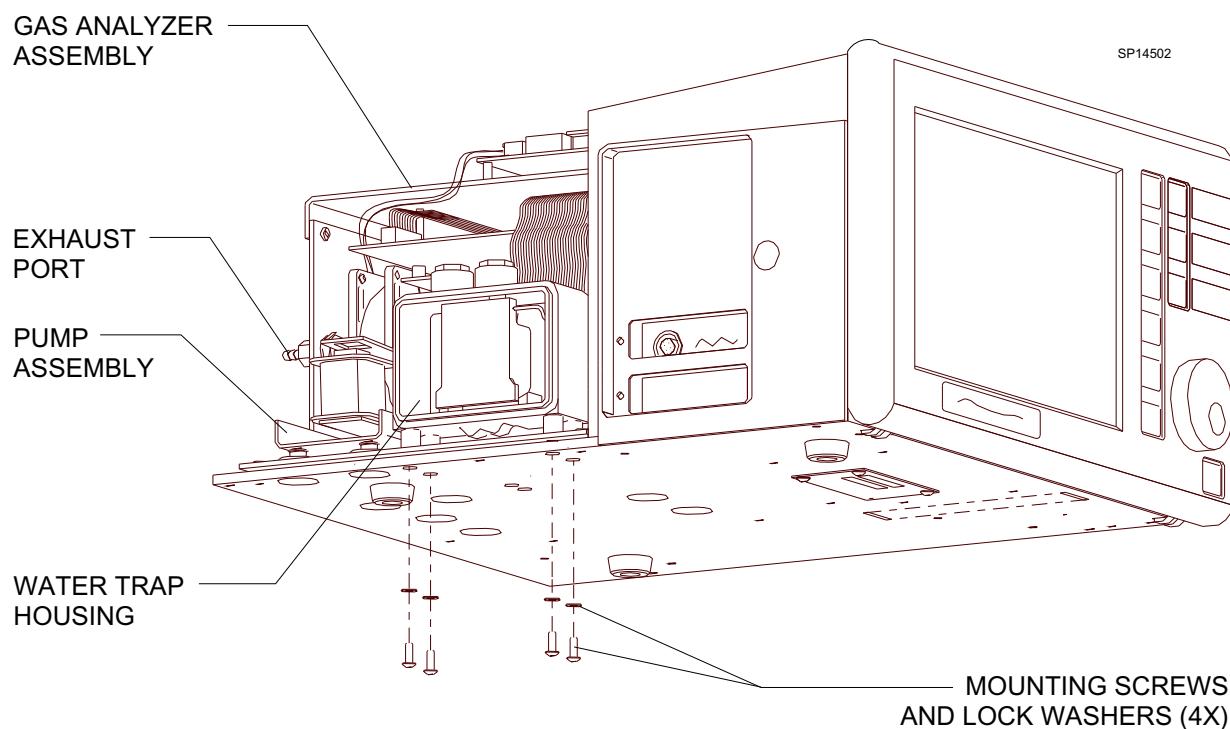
WATER TRAP HOUSING MOUNTING ARRANGEMENT
